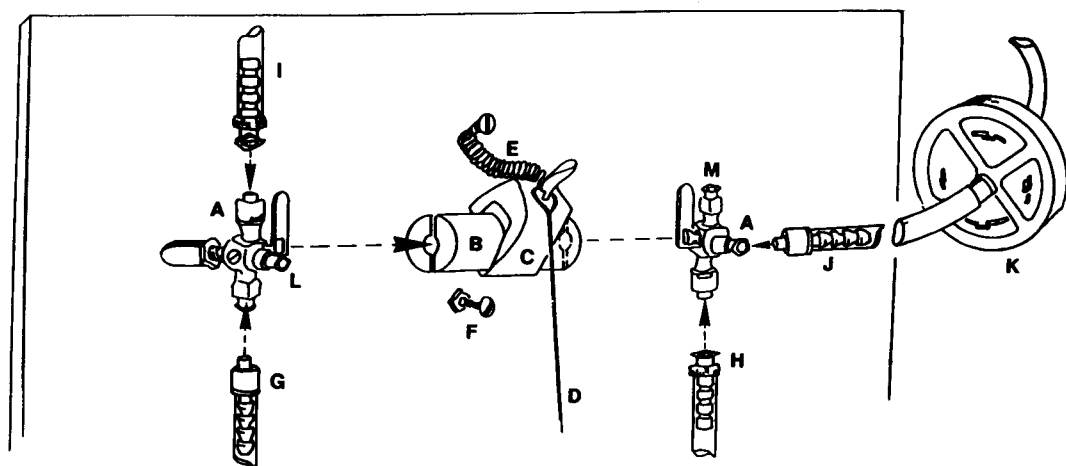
Valve assembly; A. B-D No. 3195 three-way stopcocks, B. lucite rod connector, C. tubing clamp, D. operating cable, E. return spring, F. valve stop, G. pressure line from pump, H. suction line from pump, I. aspirator line attached to stopcock top port, J. aspirator line attached to stopcock side port, K. Gelman No. 4402 "Vacushield" filter, L. stopcock side port, M. stopcock top port.
